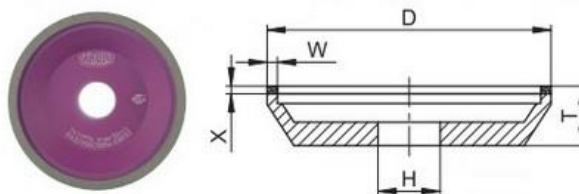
Abrasive grinding wheel shape 12A2 45° (conical cup)
